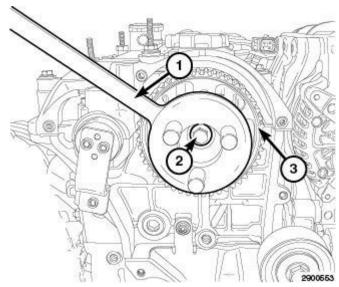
Locking Tool, Camshaft Sprocket & Bolt Courtesy of CHRYSLER LLC
